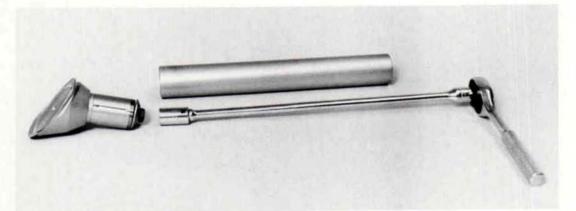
B-An extension socket wrench is required to reach in the pylon and tighten the bolt.
